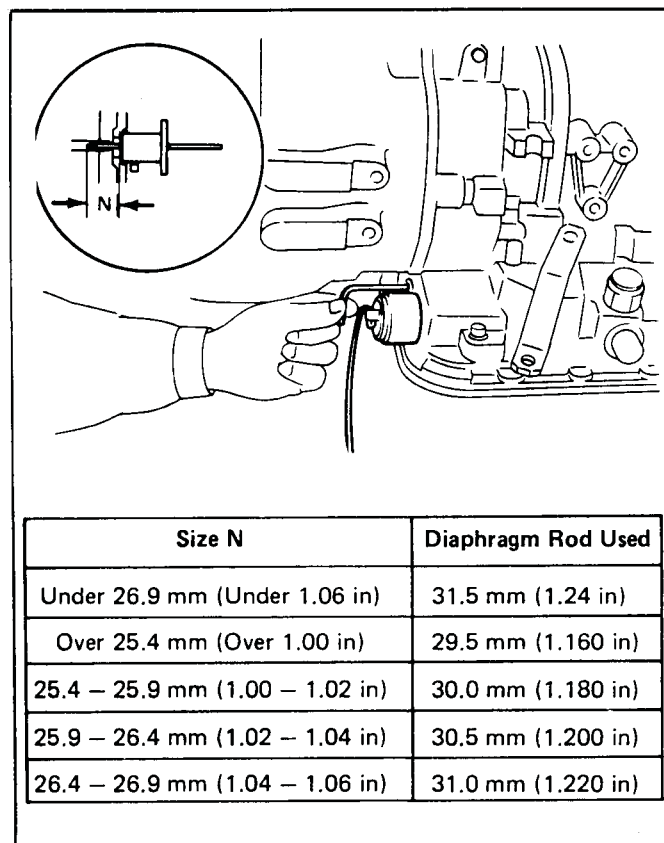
A-137 Measuring Vacuum Diaphragm Rod
